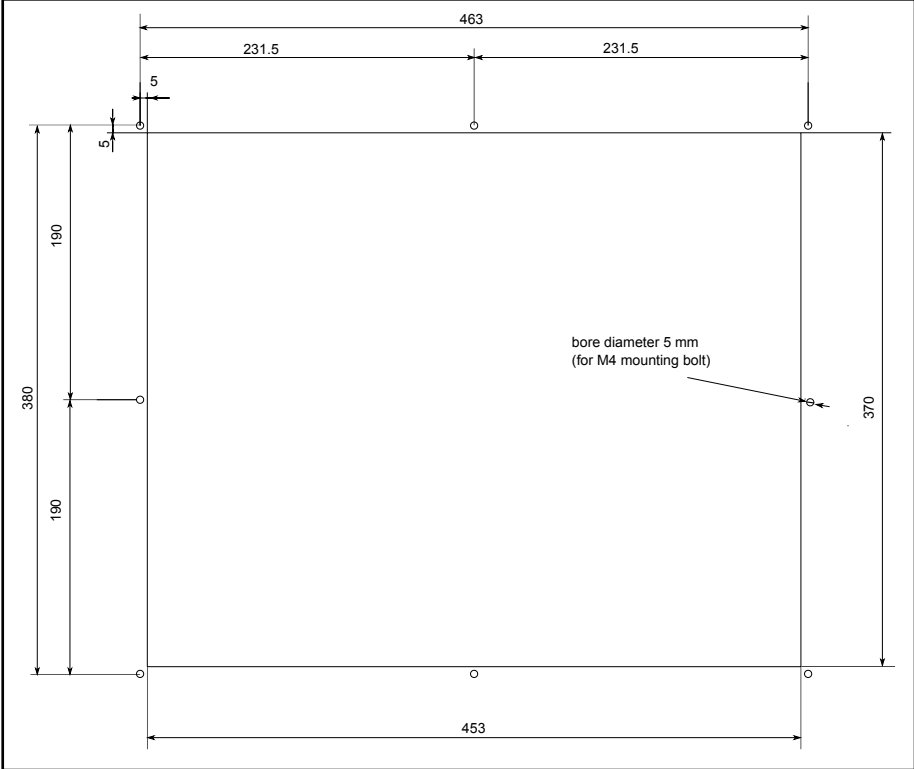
Mounting dimensions of the VDP 60.3 devices
